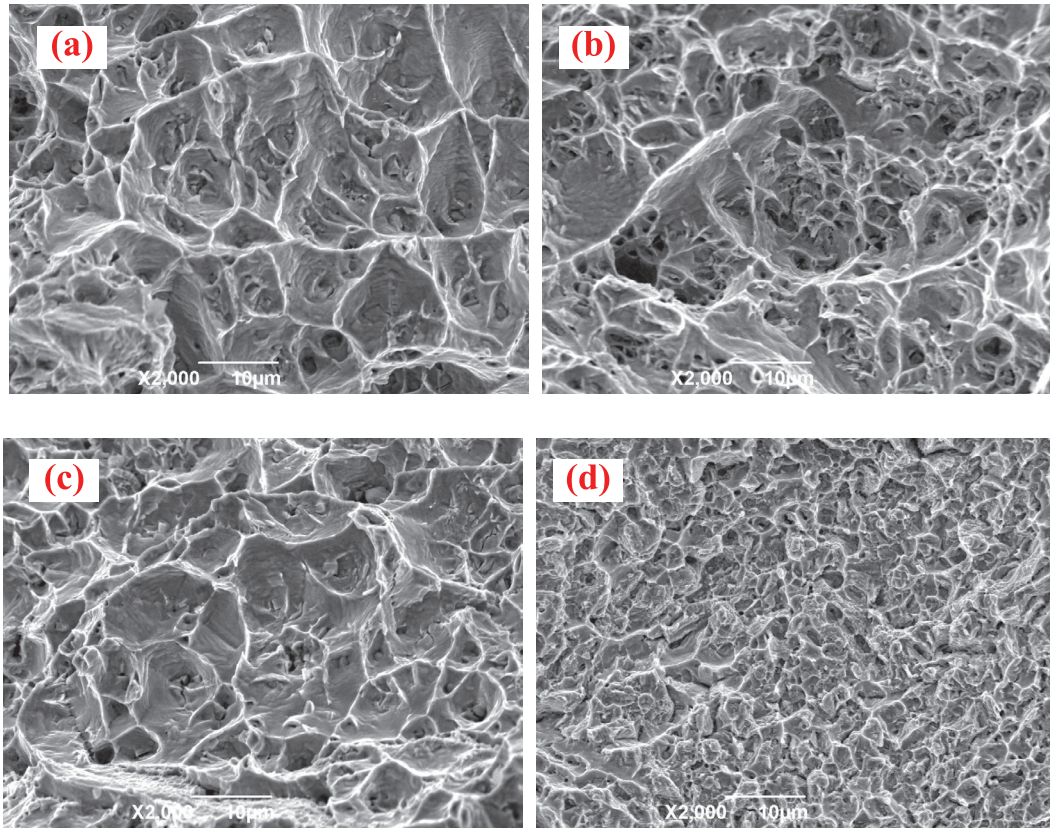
SEM fractographs of impact fracture: (a) Super 304H, (b–c) T92, (d) weld metal
